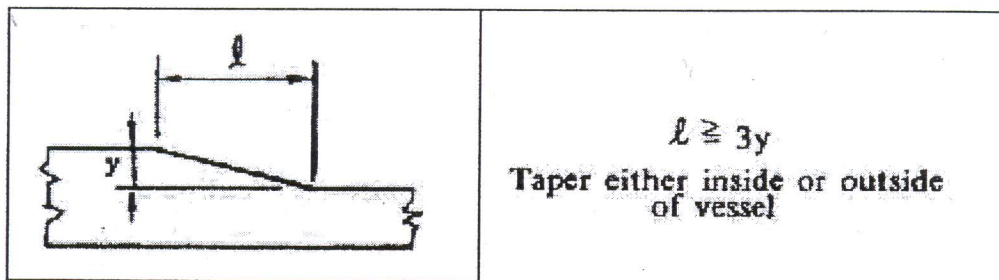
Butt welded joint of plates of unequal thickness
